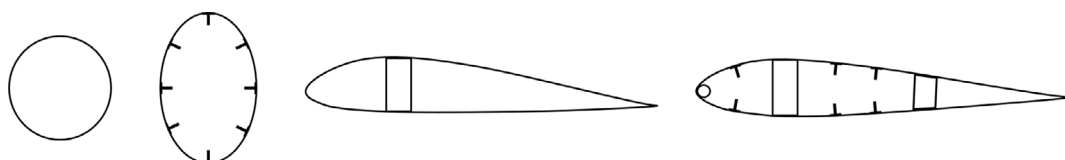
Cross-sections of typical elements used in the construction of flying models.
